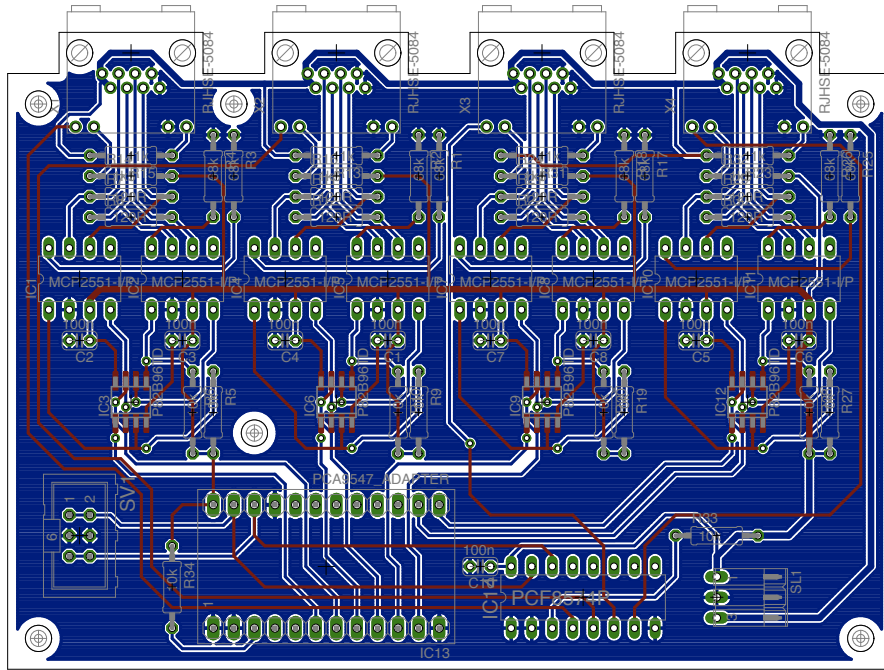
PCB layout of the I²C multiplexer. The two-sided layout has a size of 109 mm × 81 mm and has drill holes matching the layout of the USB to I²C adapter module to allow stacking with 20 mm straight connectors.
